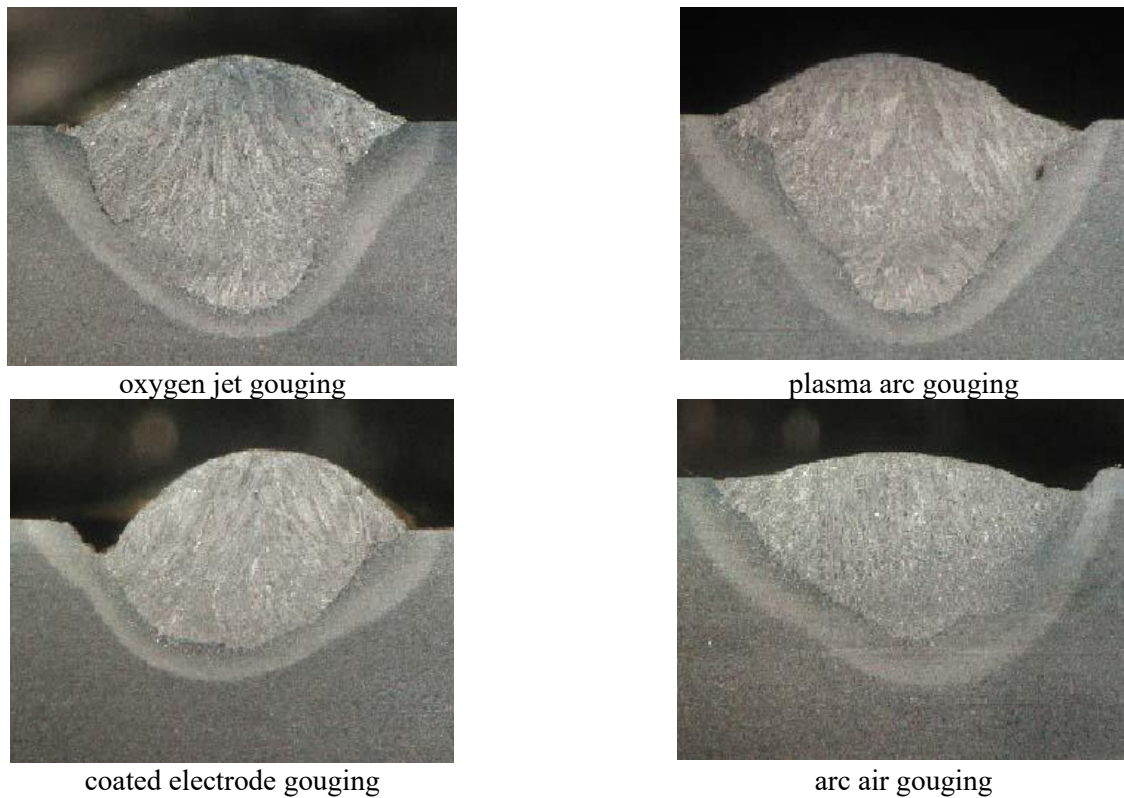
Macrostructure of surfacing welds made in grooves of 10 mm thick S420 MC steel without removed oxides after a) oxygen jet gouging, b) plasma arc gouging, c) coated electrode gouging, d) arc-air gouging
